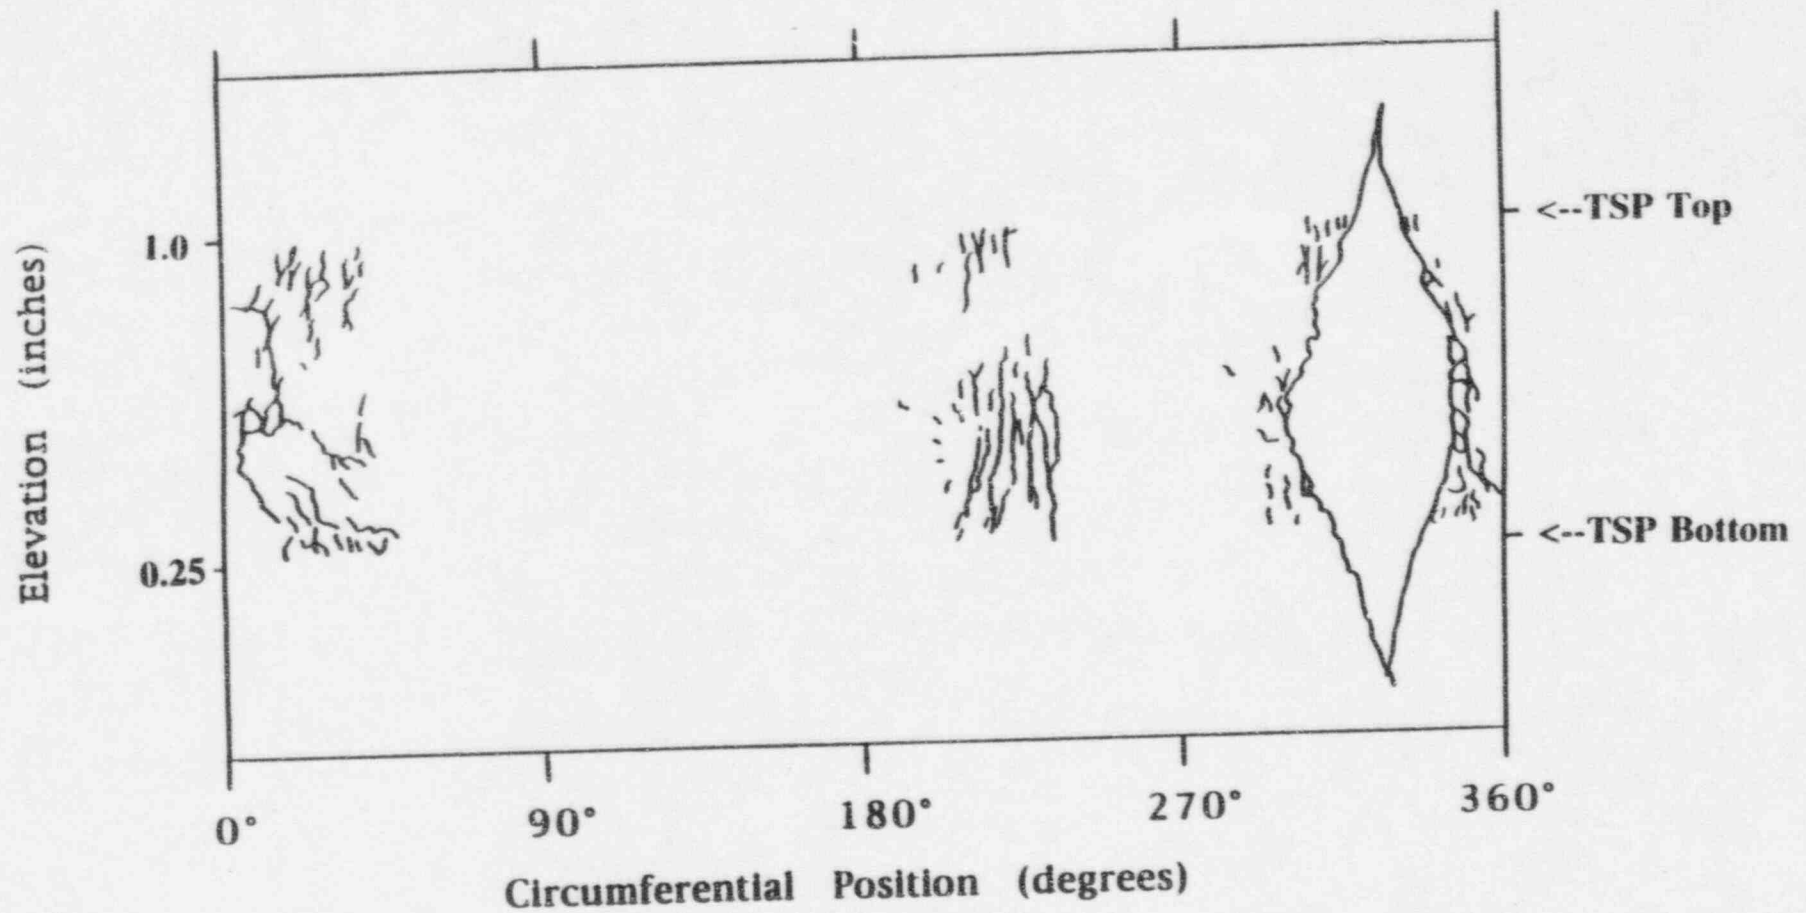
Sketch of the OD surface crack distribution found at the first tube support plate (TSP1) of Tube R11C51. Also shown is the location of the burst fracture opening. The burst opening extended beyond the TSP crevice region, but the corrosion cracking was confined to the crevice region.
